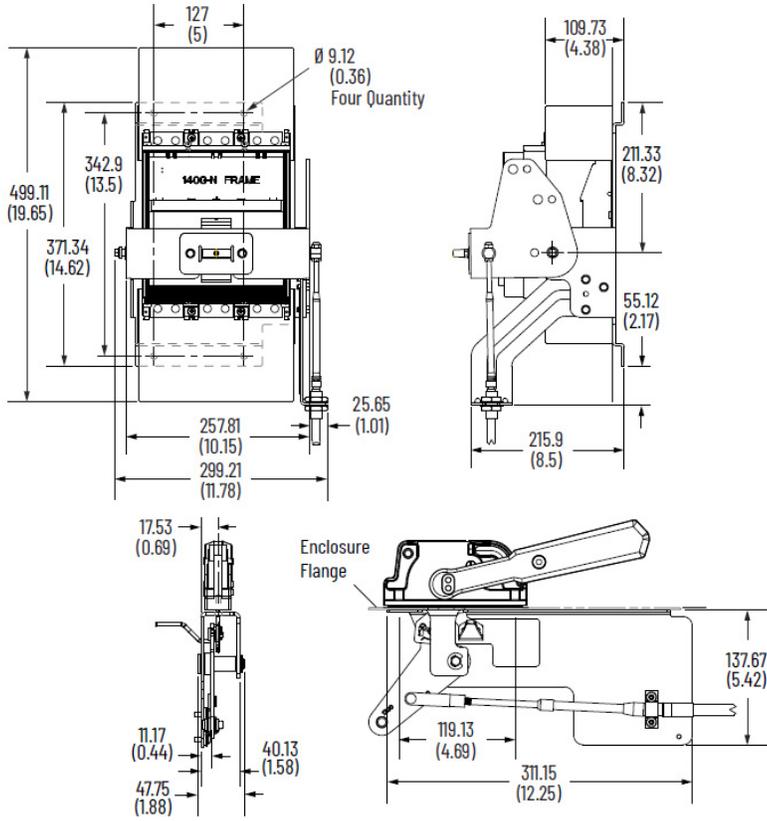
Flex Cable Operator and Actuator, Left Hand (requires Cat. No. 140G-BML, sold separately) for Frame Size N
